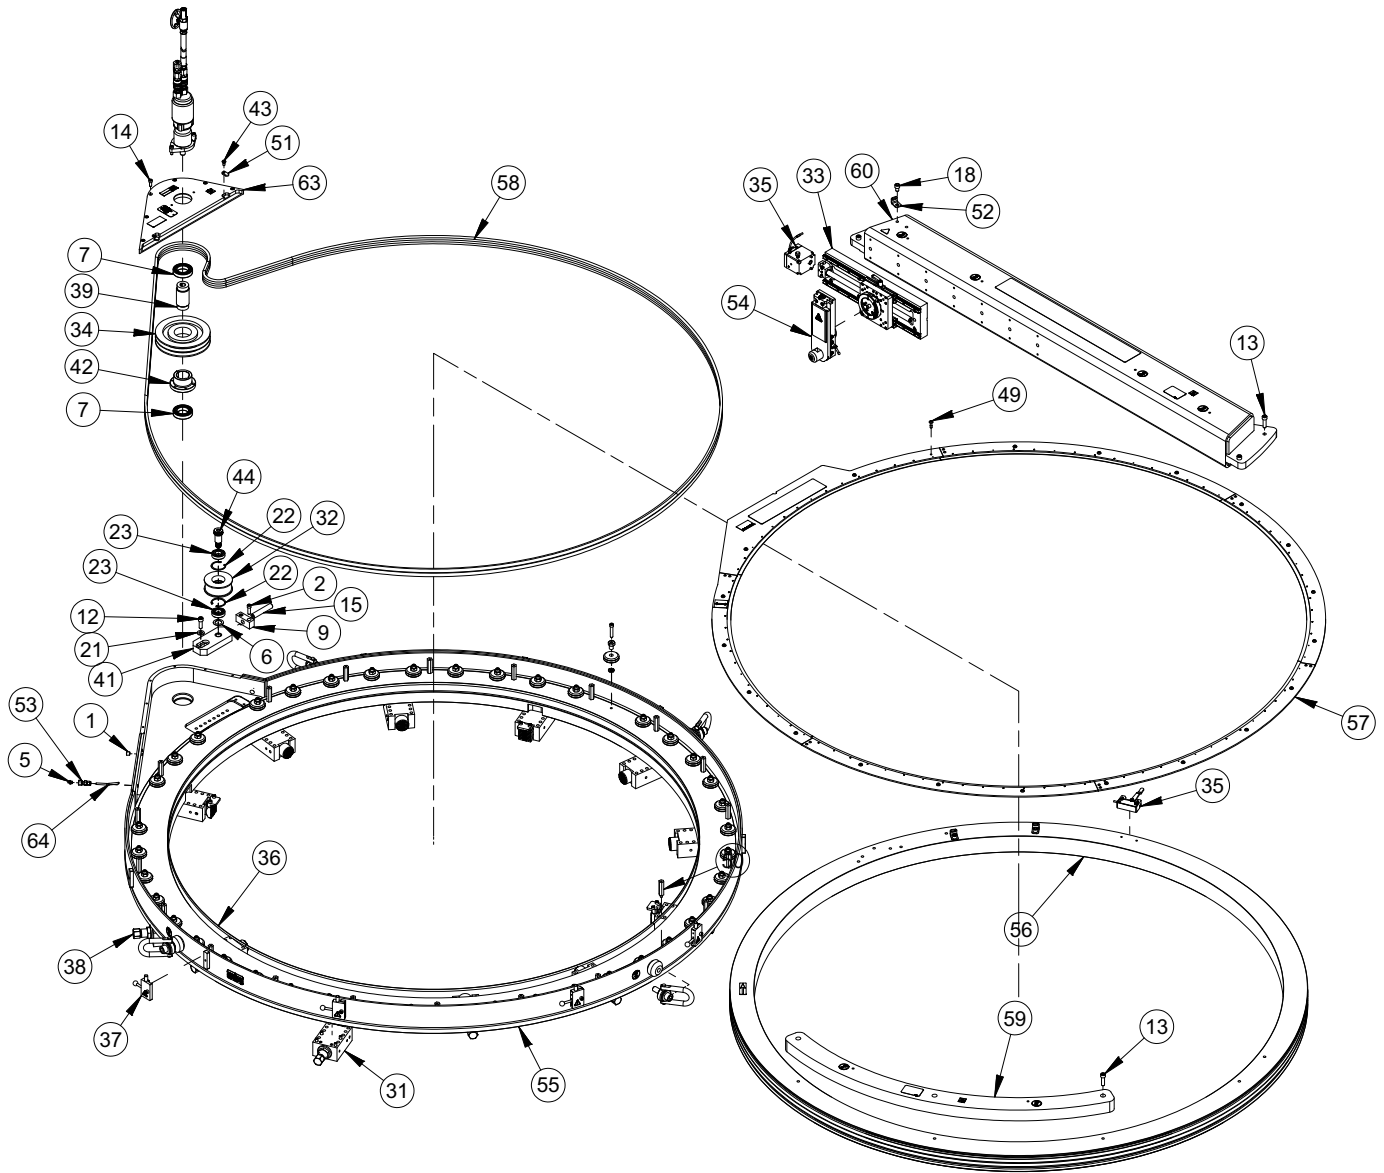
ODF80 SPEED FACER ASSEMBLY 1 (P/N 94770)
